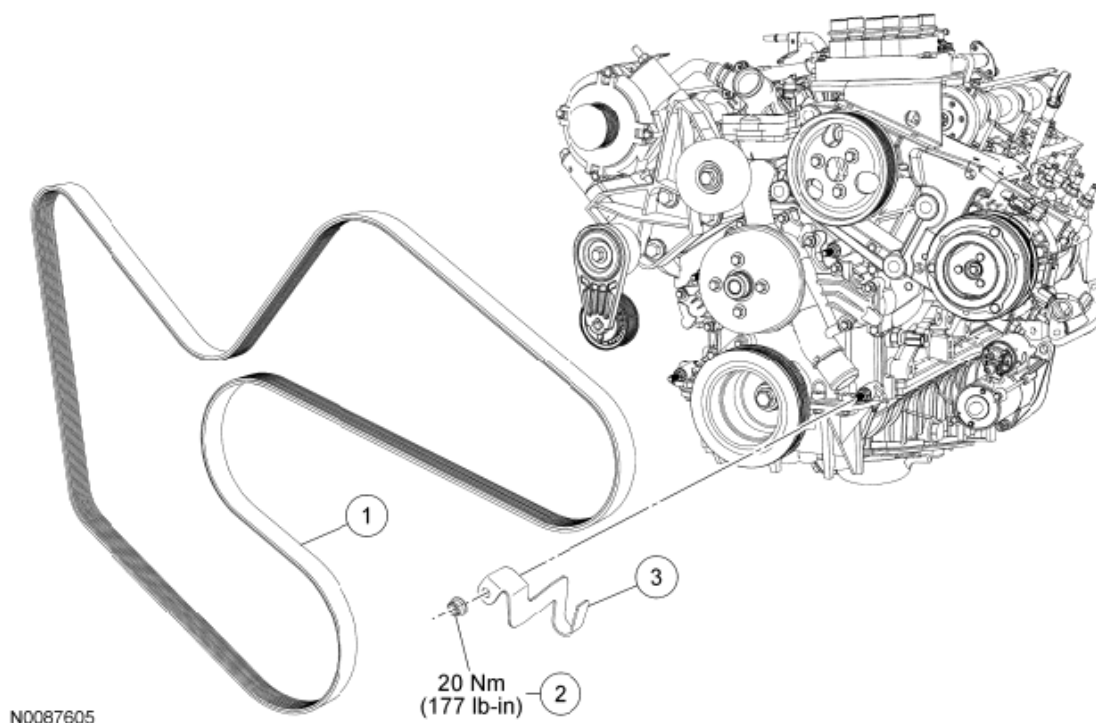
Identifying Accessory Drive Belt And Wiring Harness Bracket With Torque Specifications
